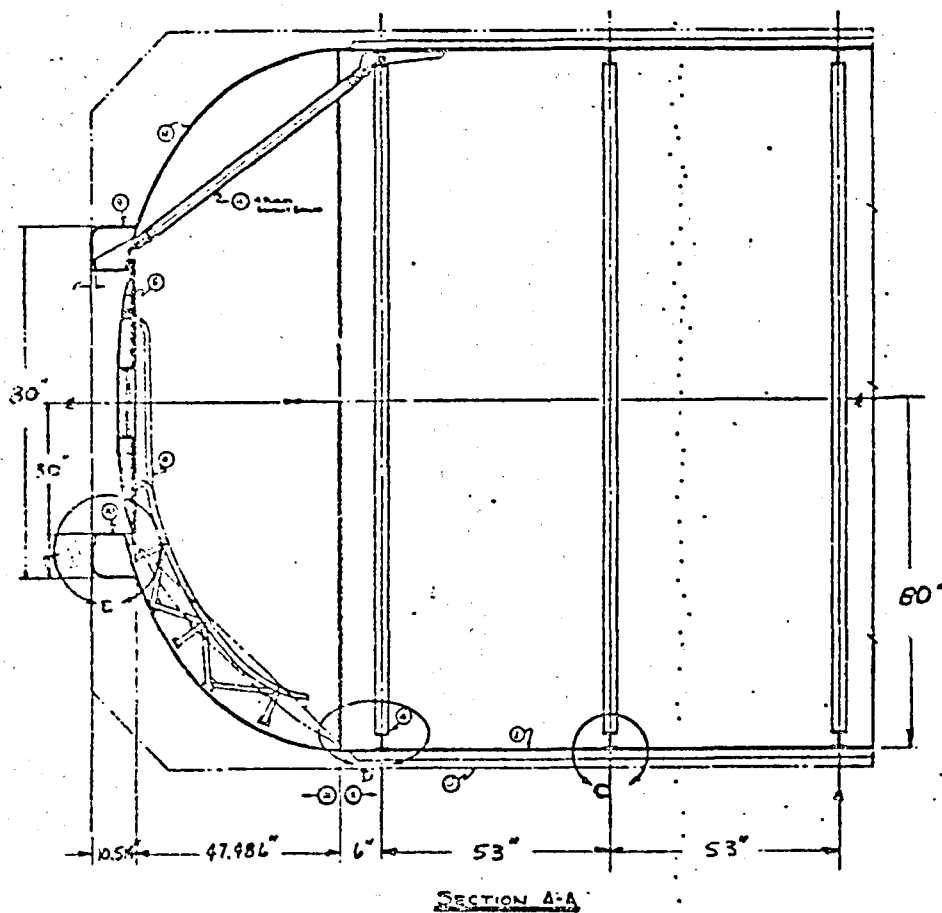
INTEGRALLY MACHINED STIFFENER CROSS-SECTION
